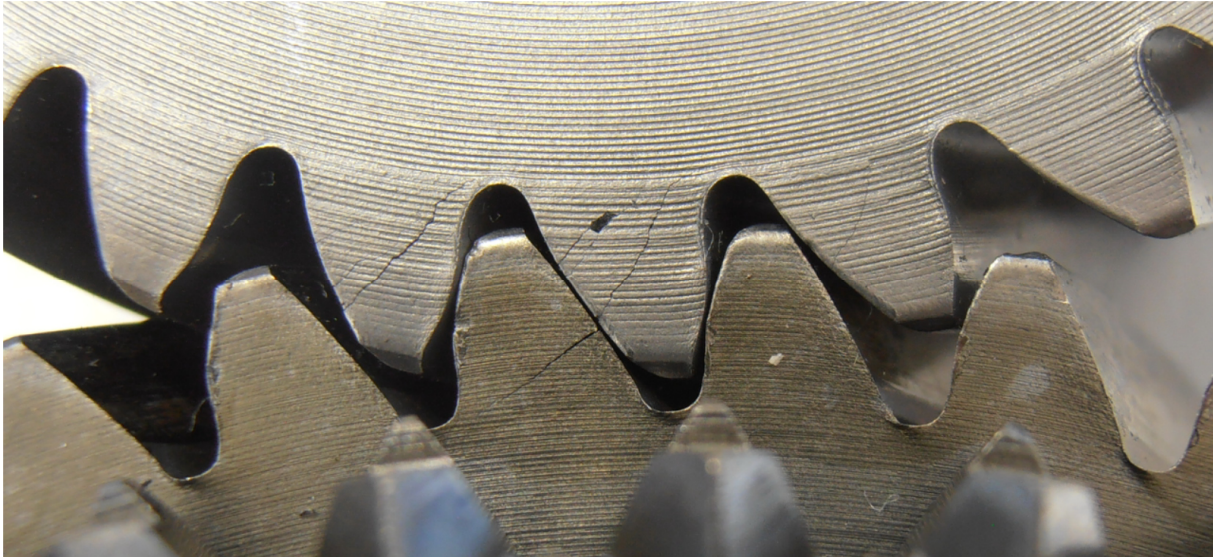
Meshing of PM rolled gears with asymmetric profile, both gears have already cracks.
